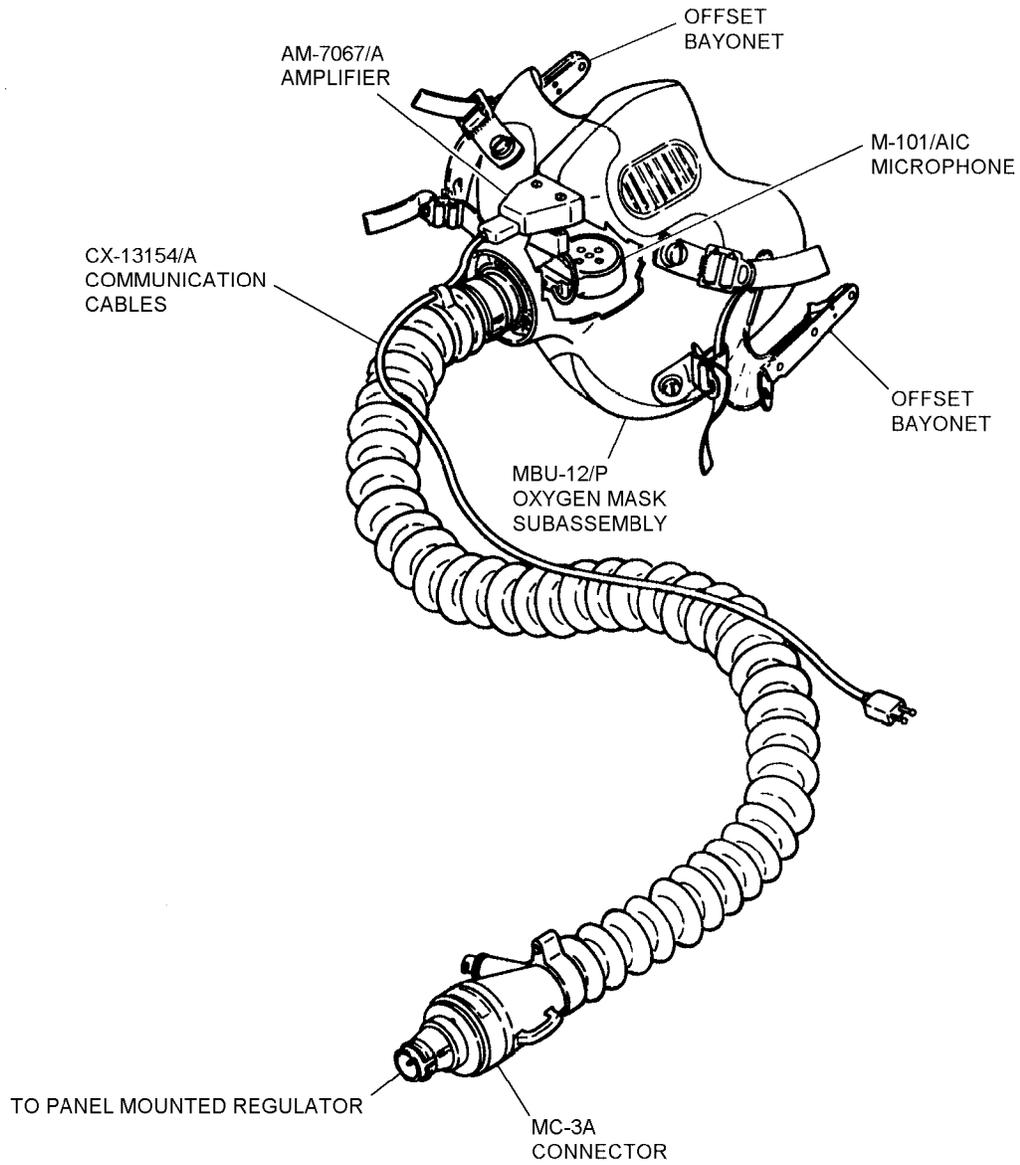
MBU-17(V)1/P Oxygen Mask Assembly
